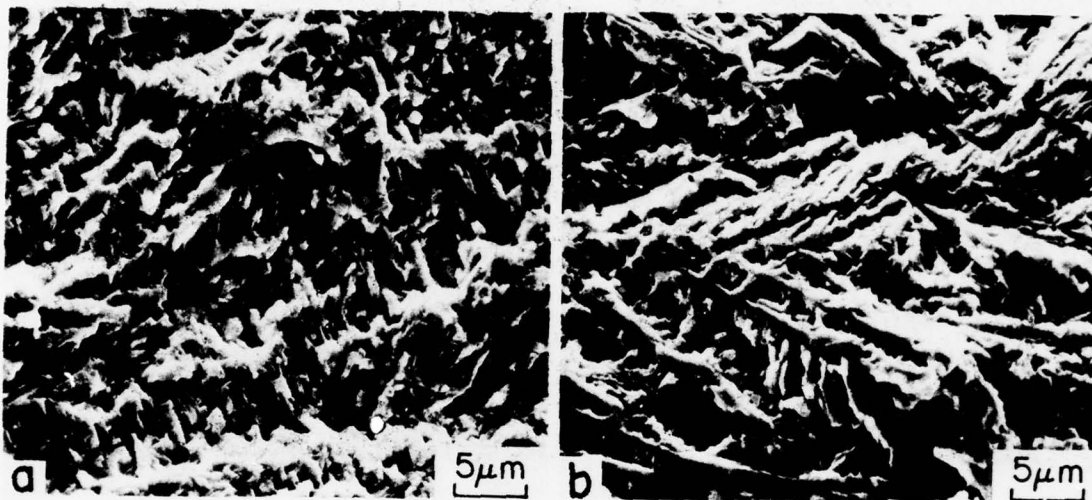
Fracture surface of Condition 5 tested at 20 Hz in dry air.
